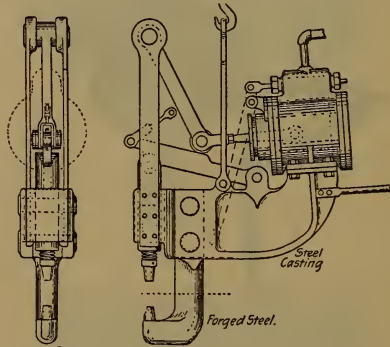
PORTABLE PNEUMATIC RIVET DRIVER.
